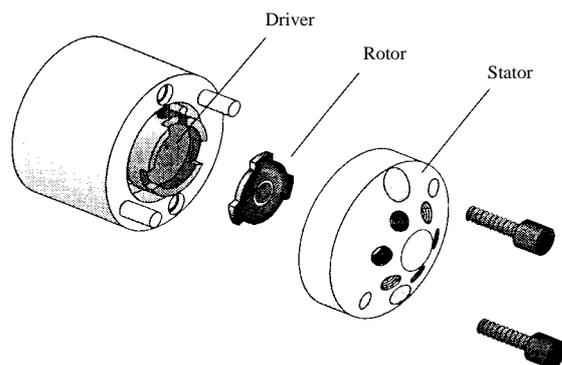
Exploded View of the Valco Model C2 Valve (6-port Version)
